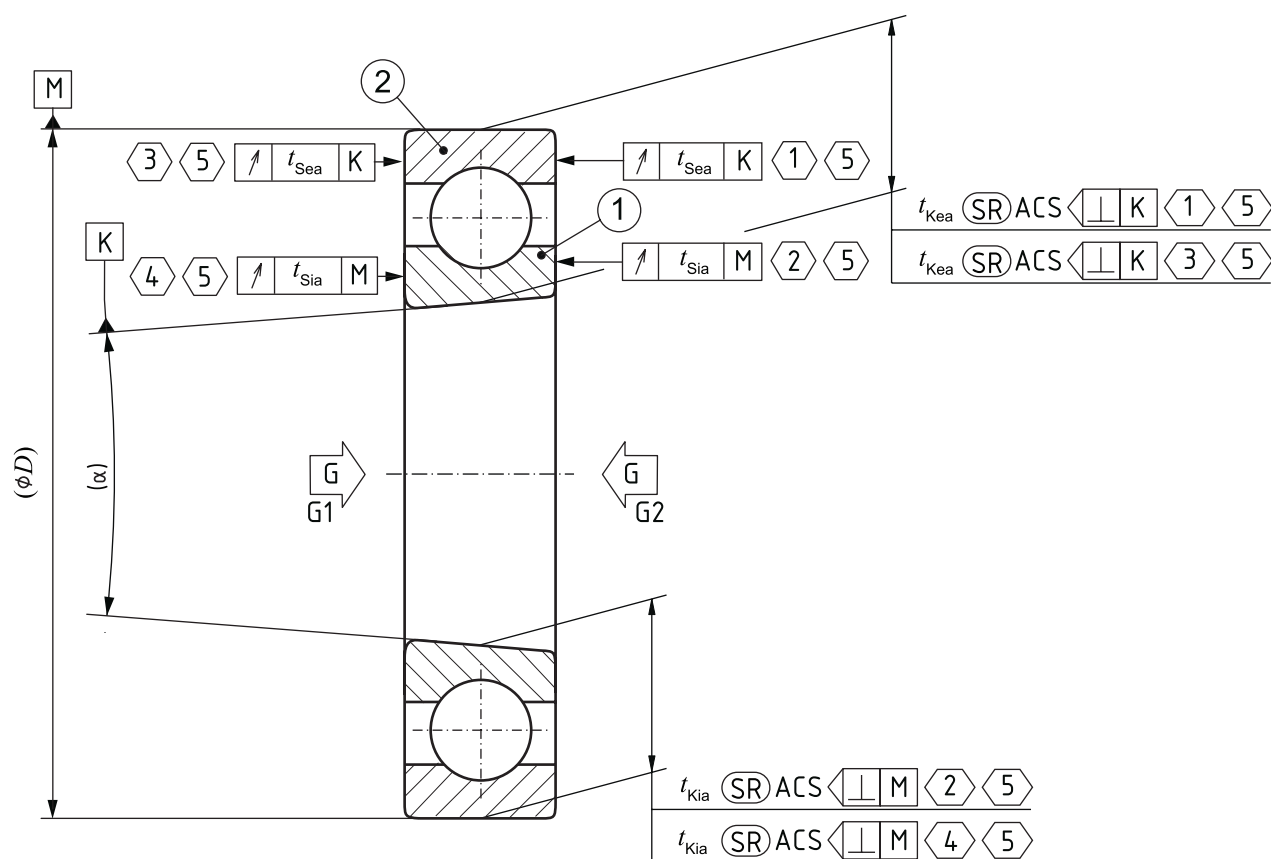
Geometrical tolerances for assembled bearing with cylindrical bore — Single-row angular contact ball bearing and tapered roller bearing
